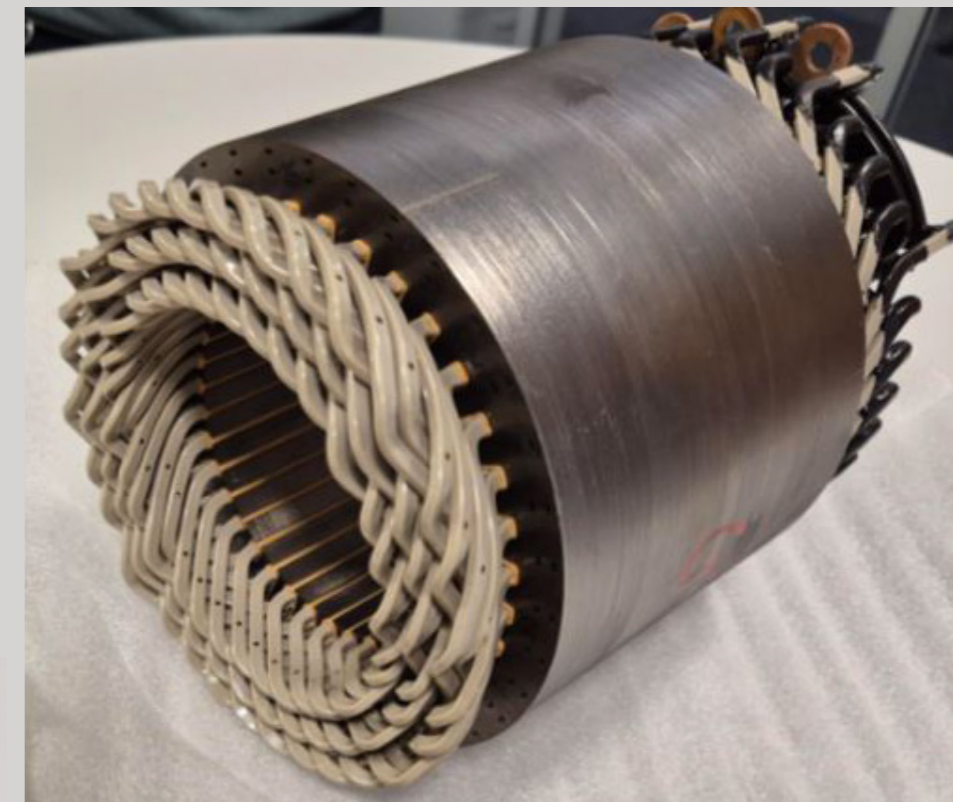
Stator assembly of the VOLTCAR traction motor prototype, showing the laminated core and hairpin windings.
